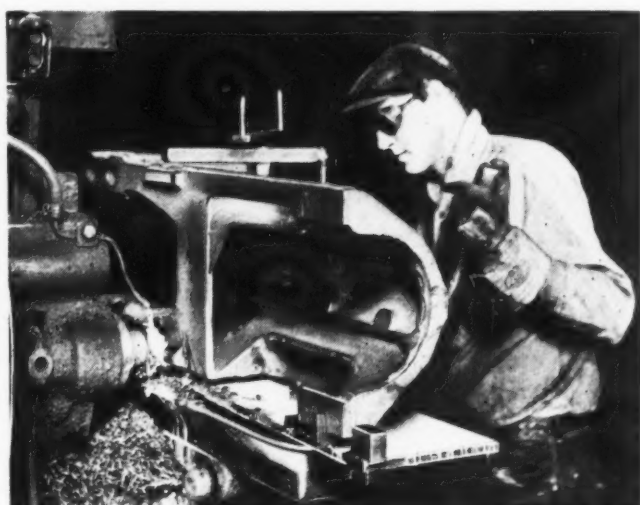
A Heavy Malleable Casting with Large Gates that are Removed by Milling
